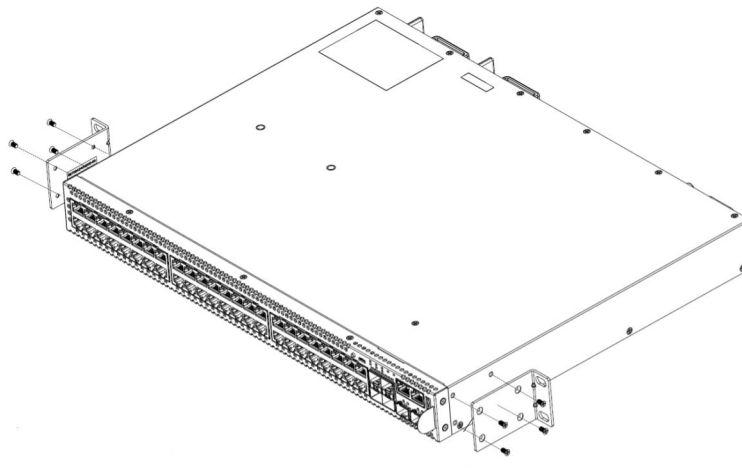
Mid-Mount: Attaching Short Mounting Brackets
